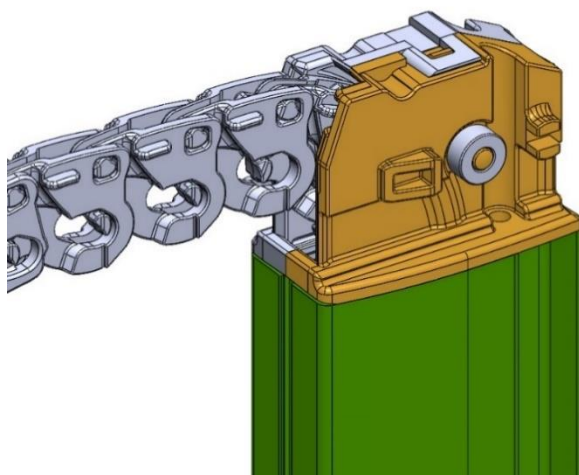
Upper handlebar head with rolling bearings installed.
